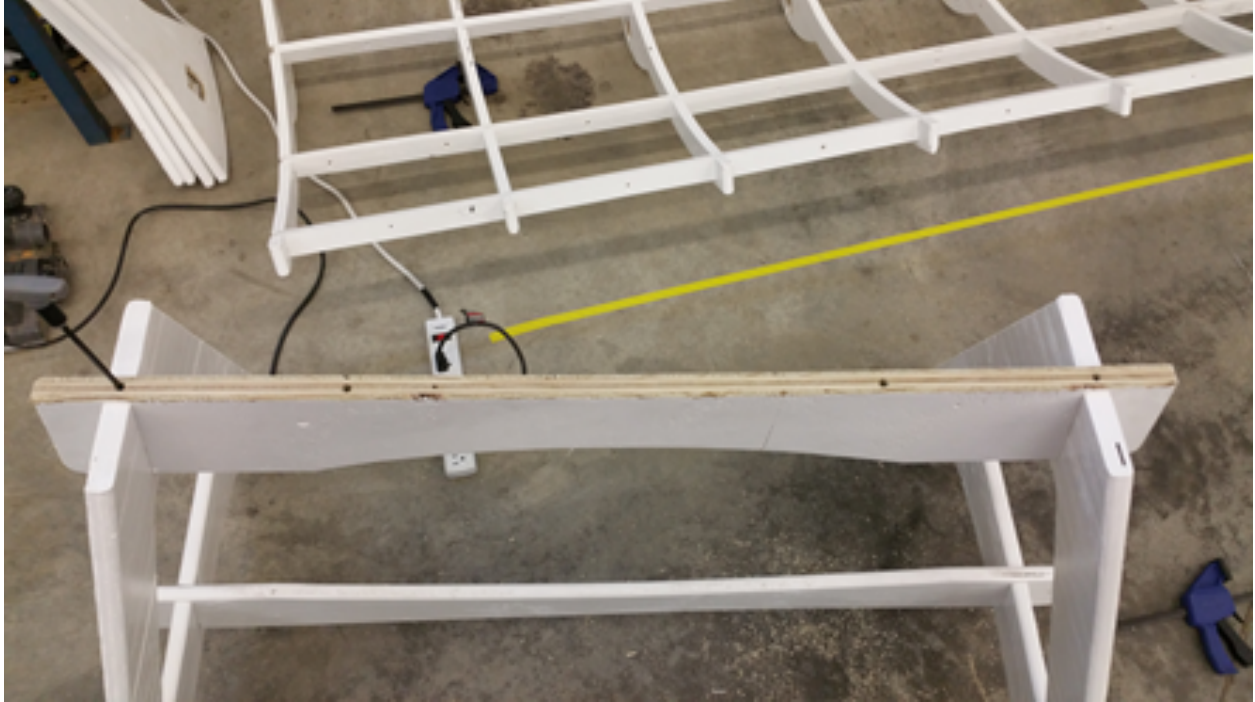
One of the assembled base pieces showing the upper base rail with threaded inserts
